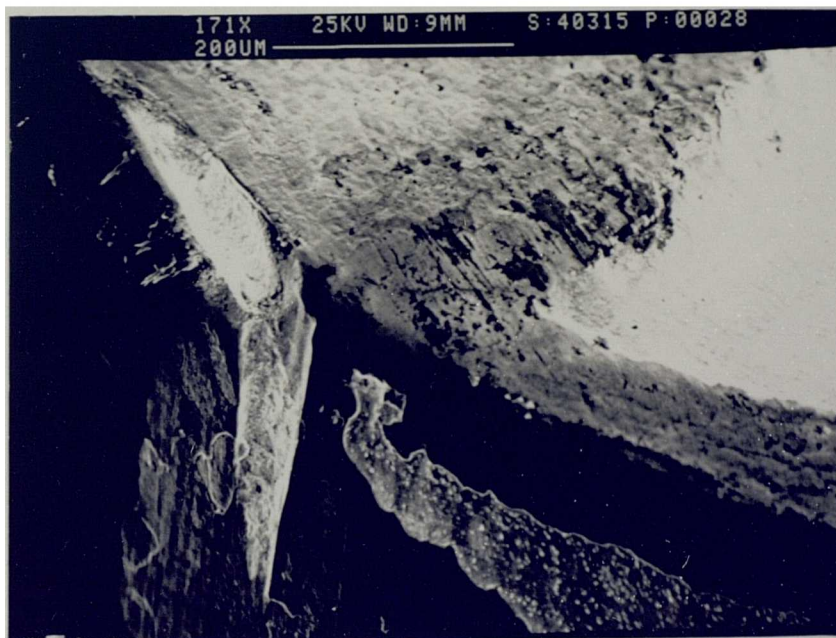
Development notch wear at clearance face with chipping at the cutting edge.
